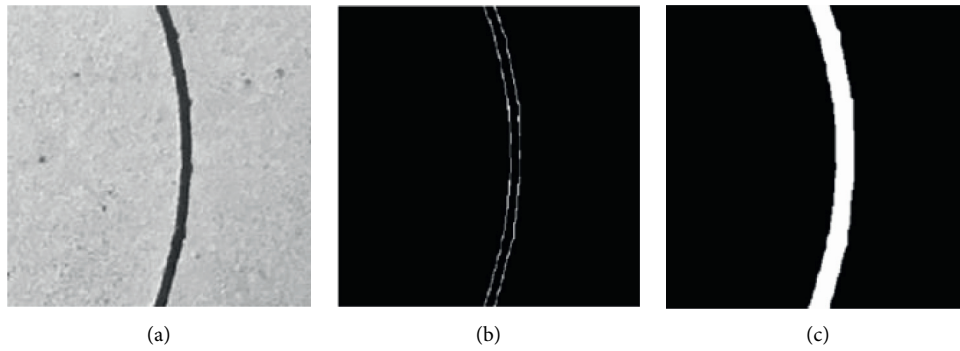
Regular arc weld. (a) Original image of weld. (b) Image of weld edge. (c) Image of weld trajectory.
